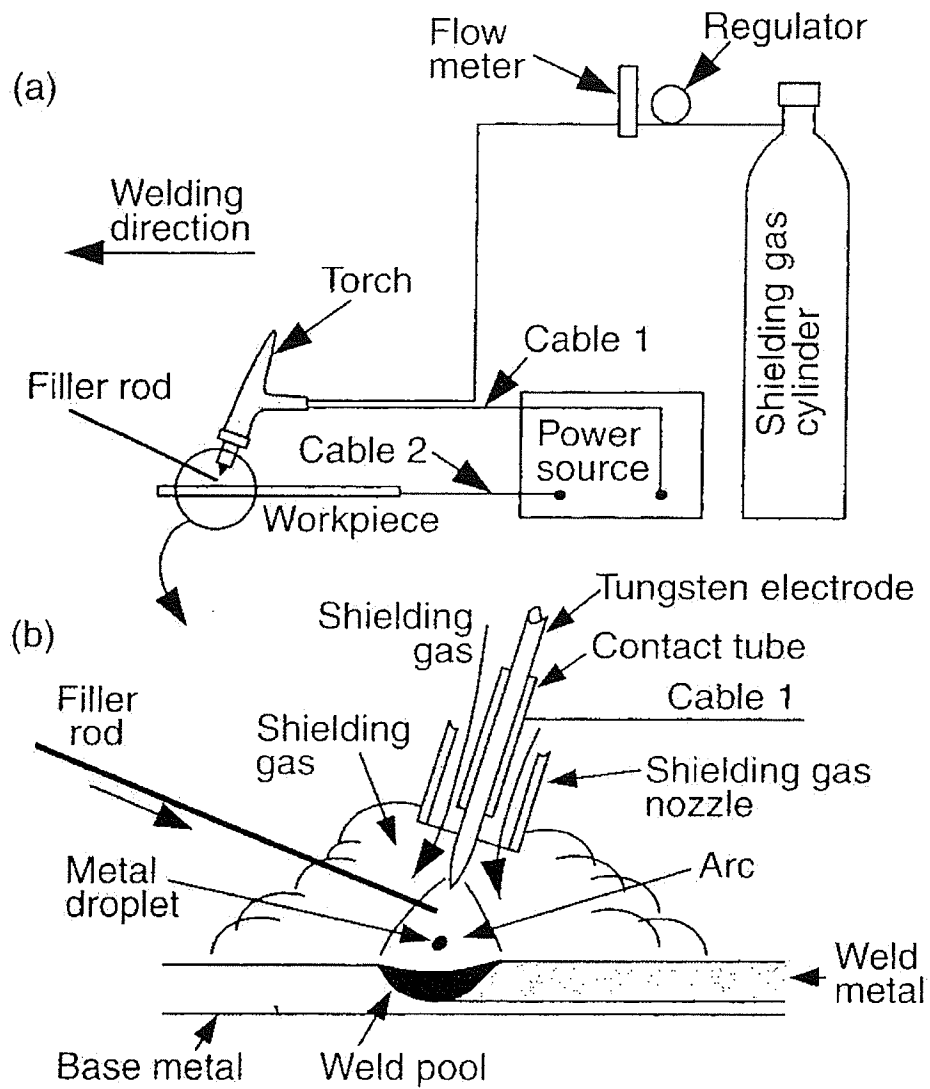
Gas Tungsten arc welding (a) overall process (b) welding area enlarged
